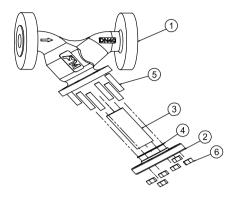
Exploded view of Forbes Marshall Cast Strainer [FMSTR34]
